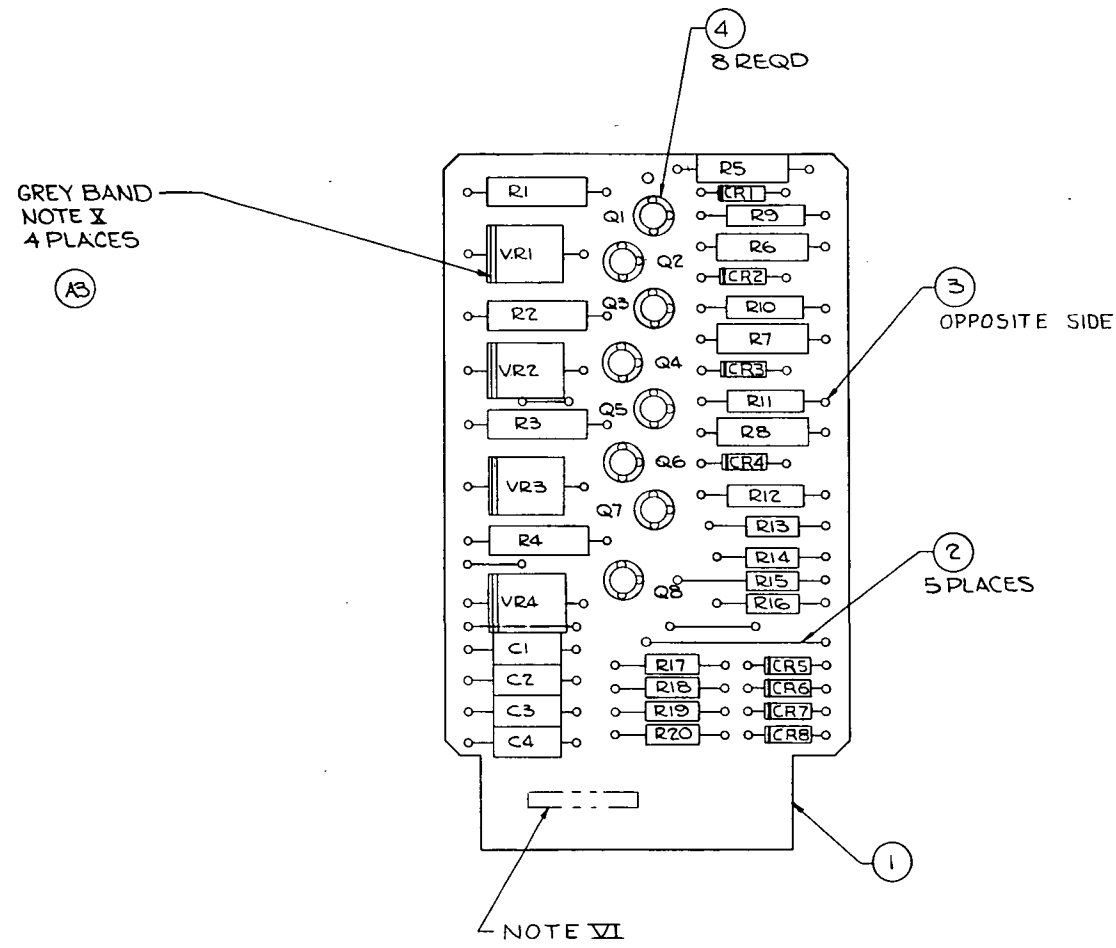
Relay Card Printed Circuit Board Assembly (6901030)
